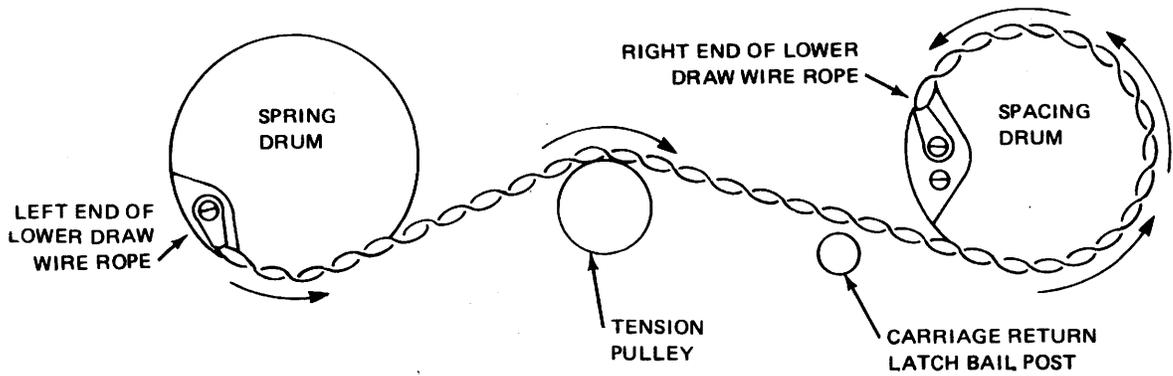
Lower Draw Wire Rope Route (Front View).
